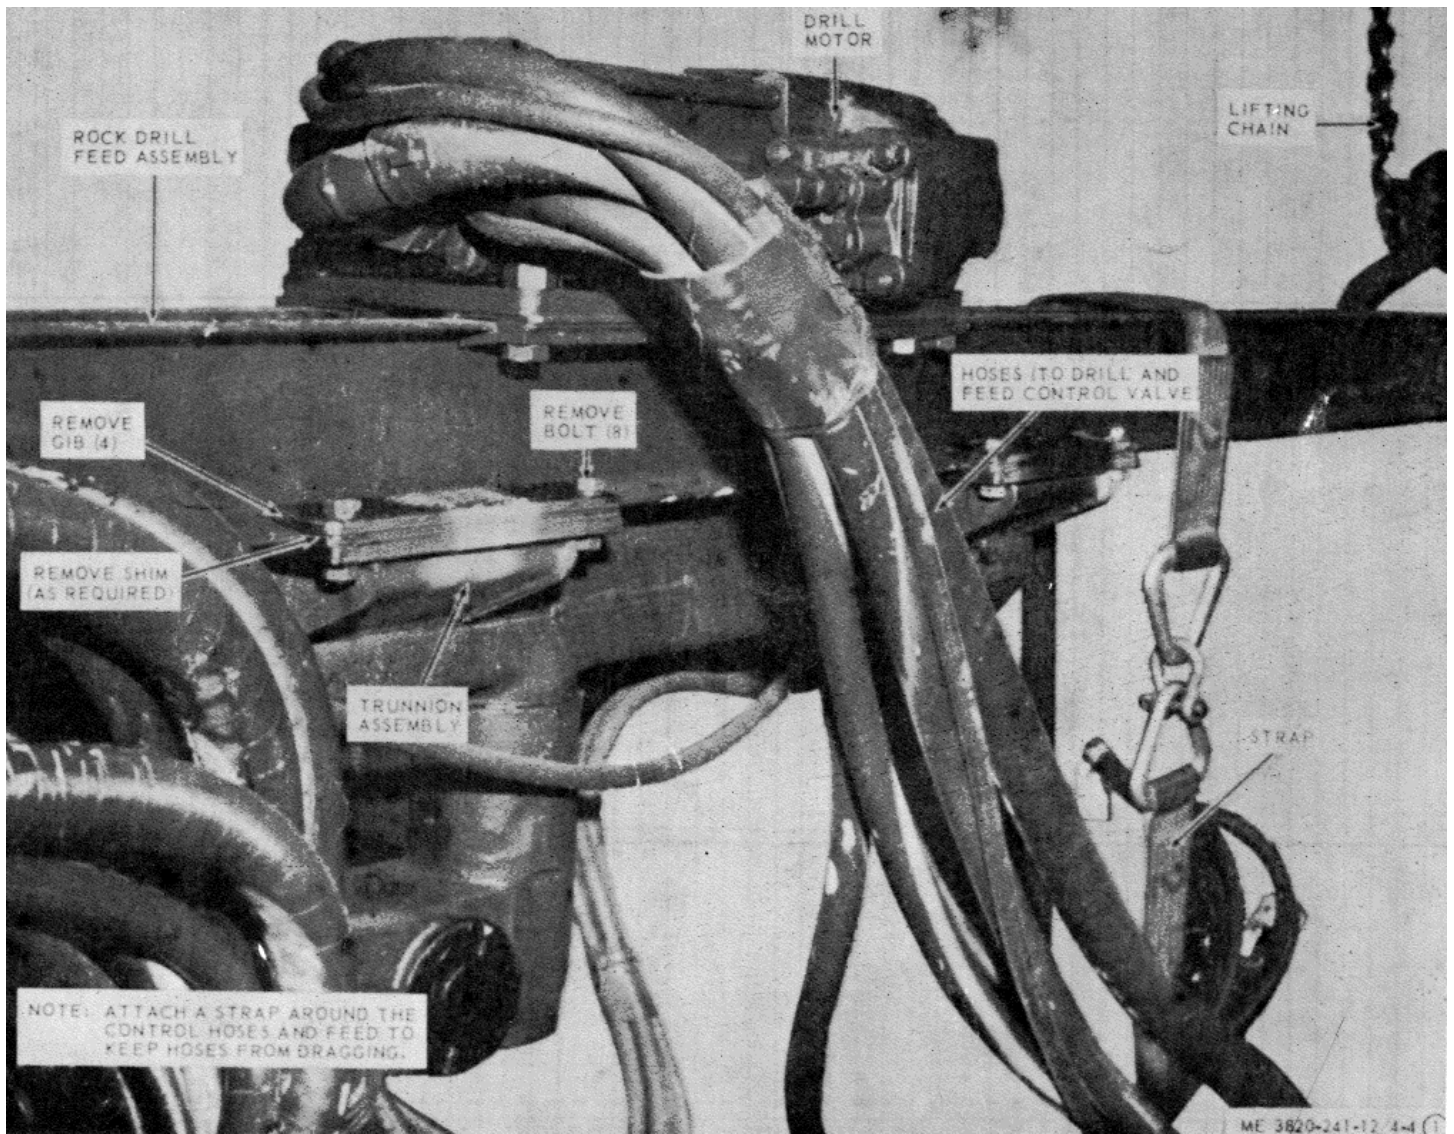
Rock drill feed assembly, removal and installation (sheet 1 of 2).
